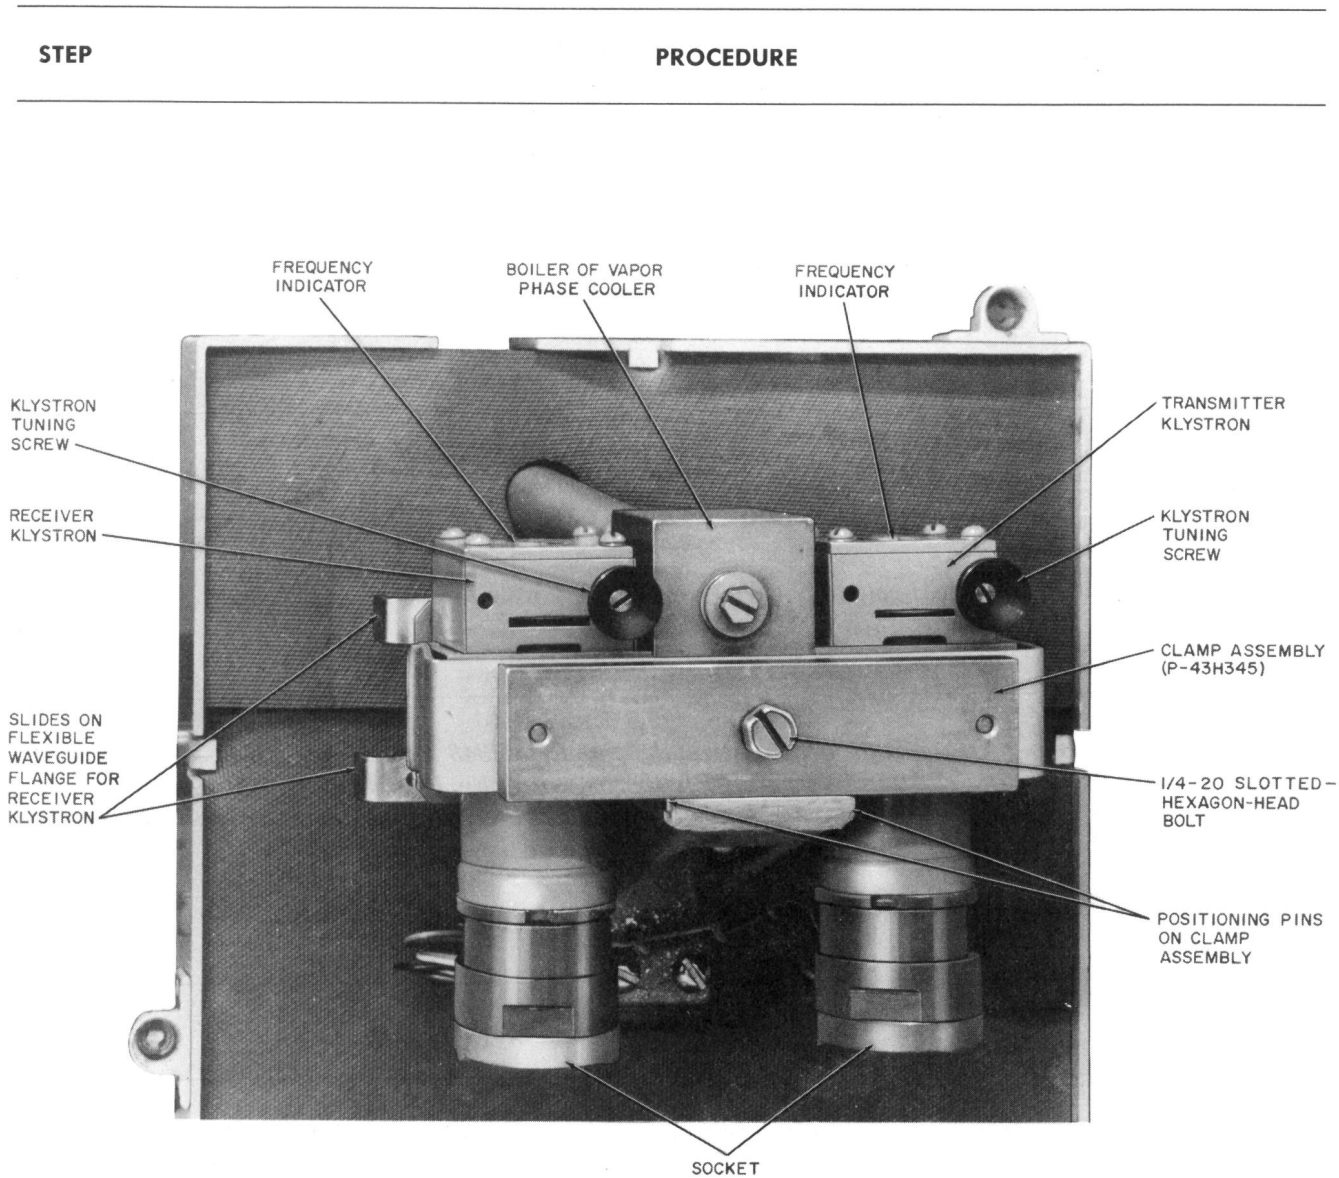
Transmitter and Receiver Klystrons and Boiler of Vapor-Phase Cooler—Cover Assembly Removed
